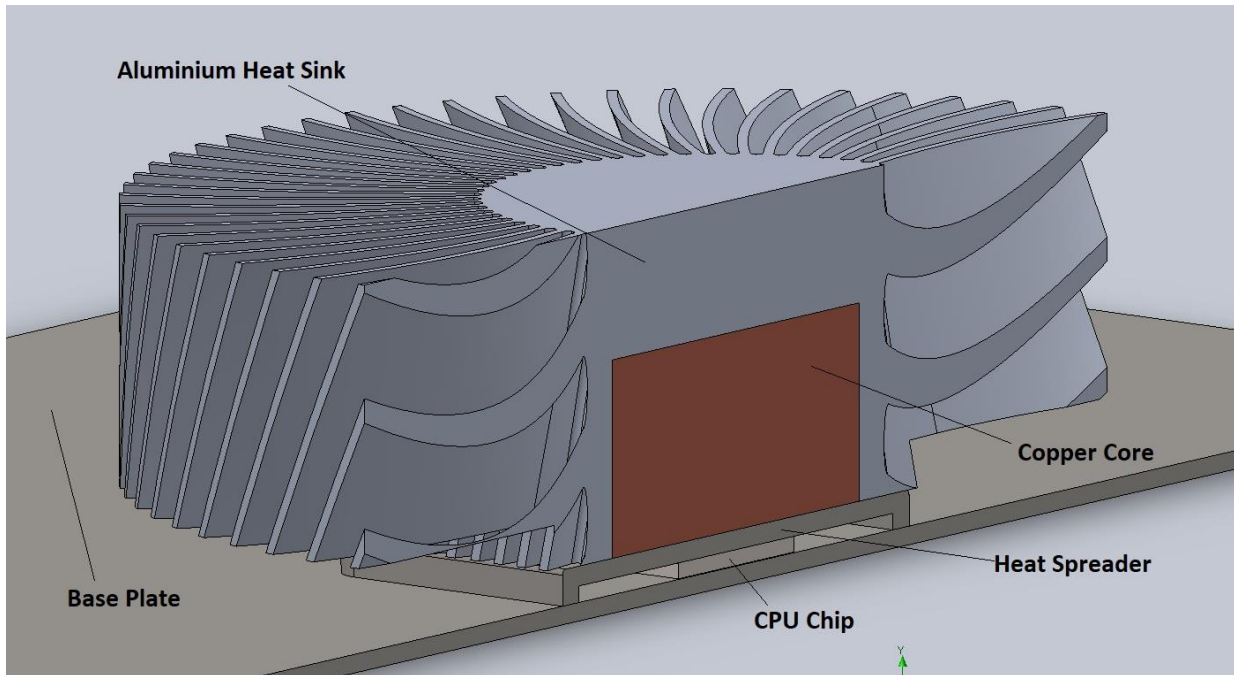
10° inclined Aluminum HeatSink with Copper Core on CPU
